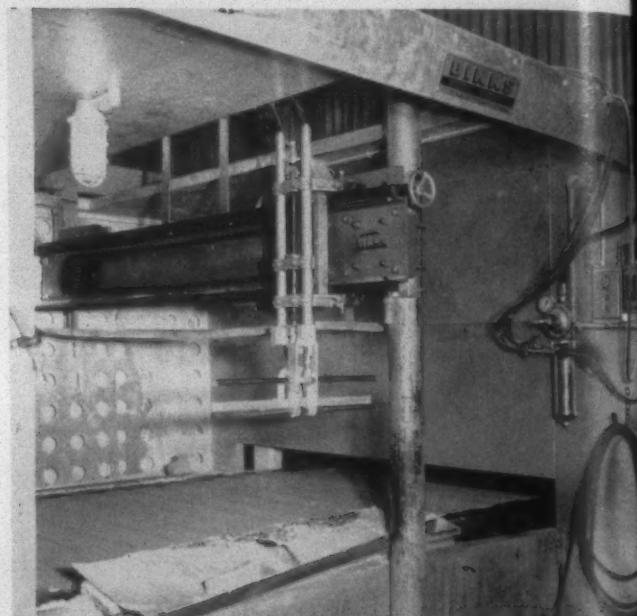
The web is transported on a steel parts conveyor belt in this spray booth with a horizontal reciprocating spray machine made by Binks Mfg. Co.
